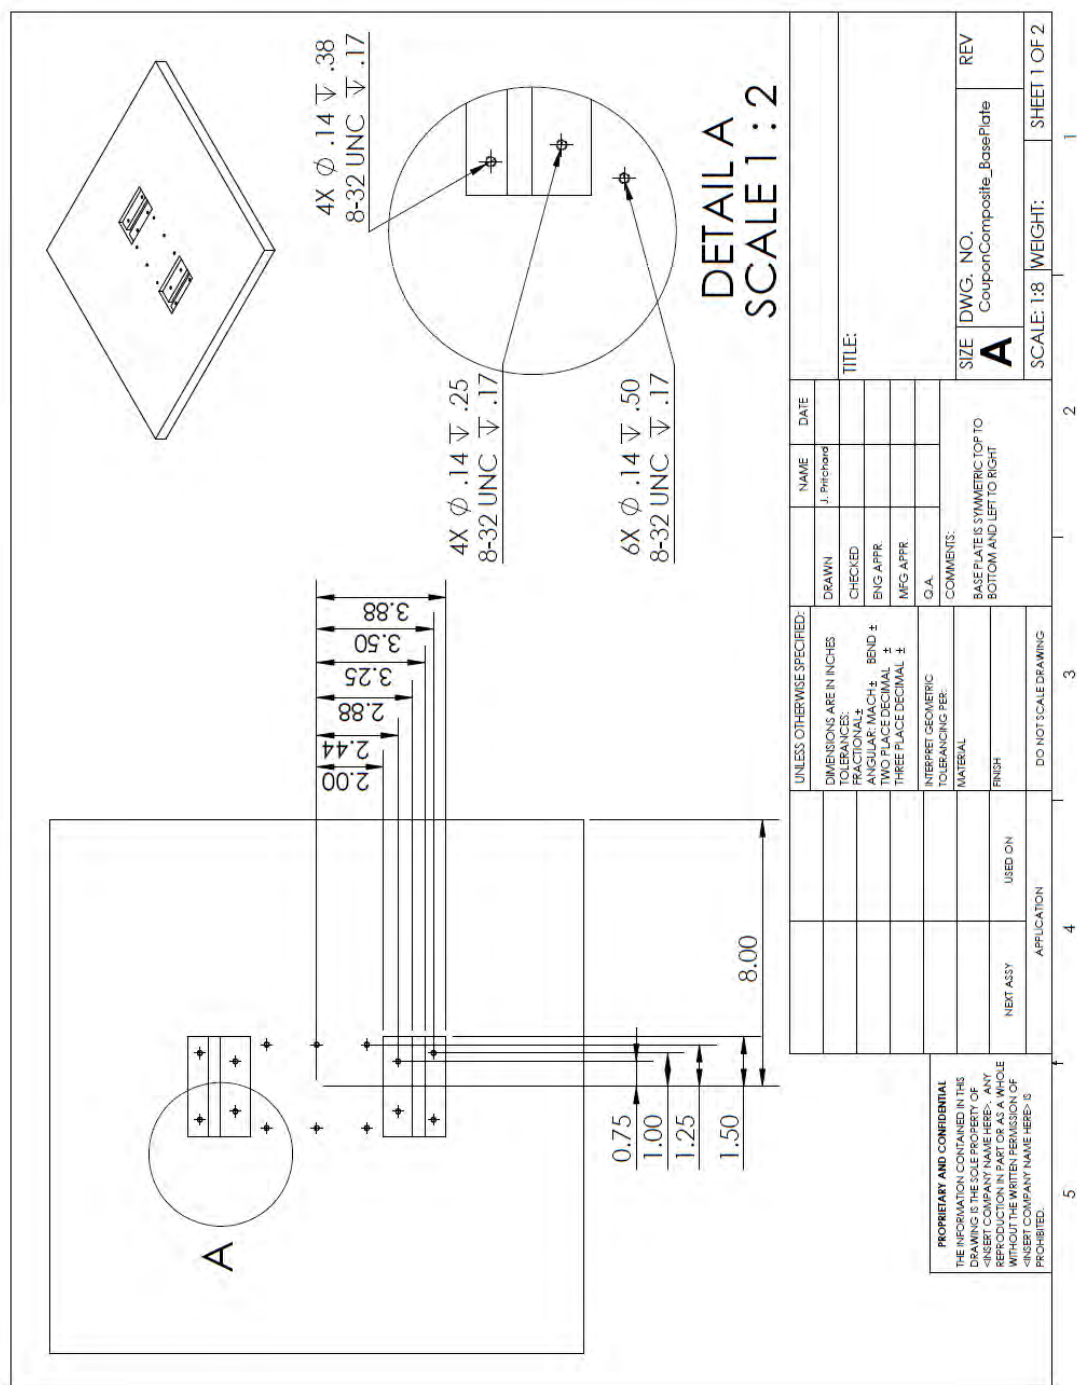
Dimensional drawing of base plate for producing coupon samples. Sheet 1 of 2.
